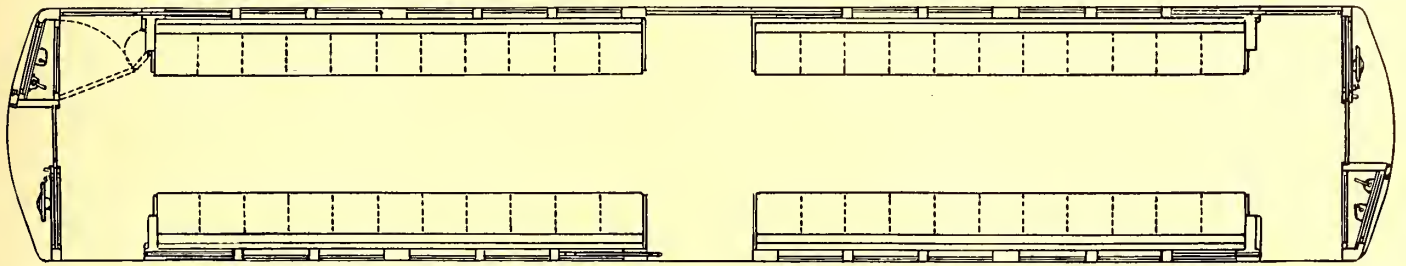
LATEST TYPE OF BOSTON ELEVATED CAR, 44 SEATS
